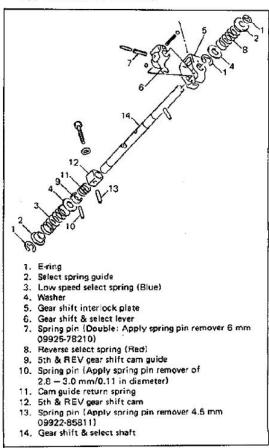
A-61 Gear Shift & Select Shaft Assembly
